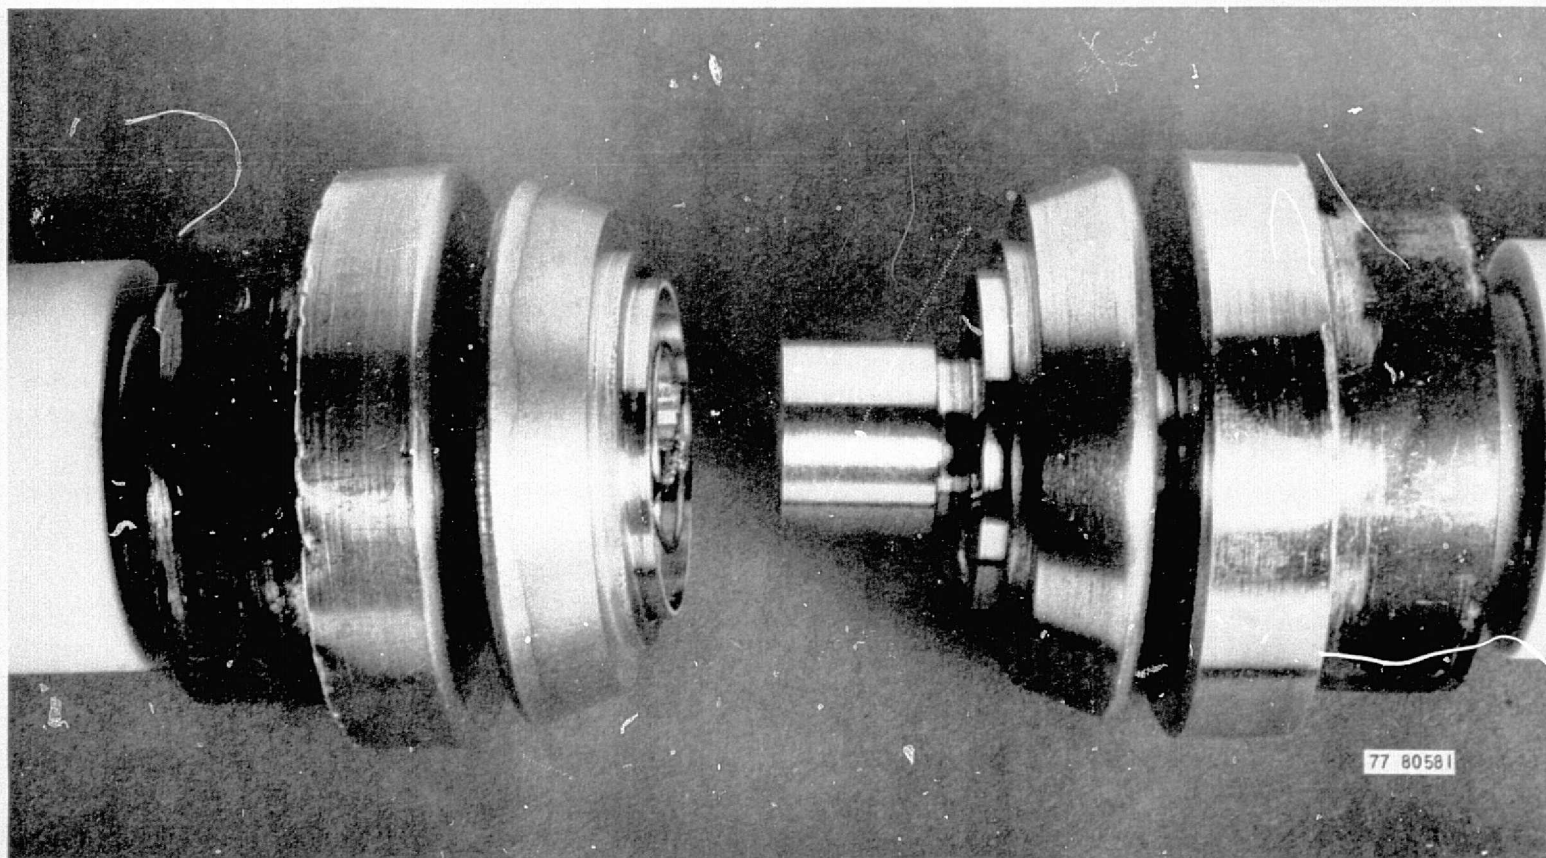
Side view of the QKS1875B halo cathode mounted on the tail-pole piece assembly together with a view of the platinum clad cathode mounted on the cathode pole piece assembly.
